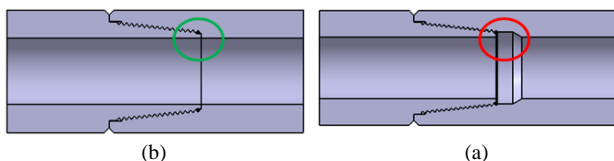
Sealing region in a) standard tool joints b) improved tool joints
